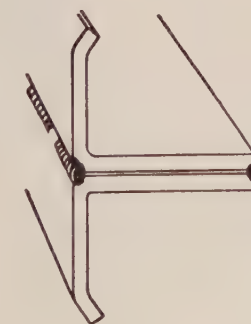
Angles, brake formed from plate, have better dimensions to withstand loading. Section requires only light, intermittent welds. Costs 30% less than Figure 1.
